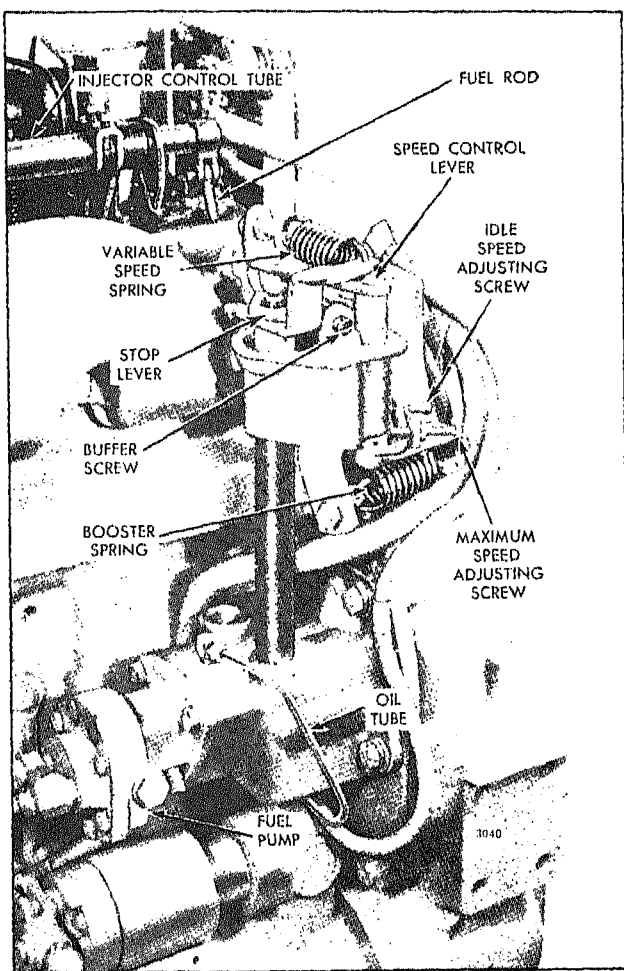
Variable Speed Open Linkage Governor Mounted on Engine
